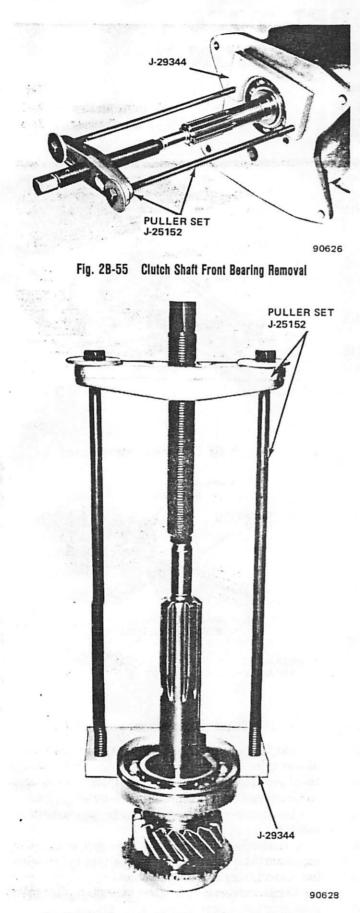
B-56 Removing Front Bearing from Clutch Shaft
